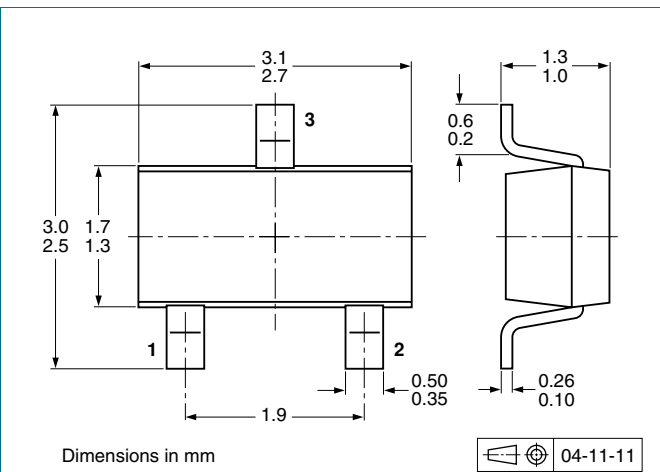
Package outline SOT346 (SC-59A/TO-236)
